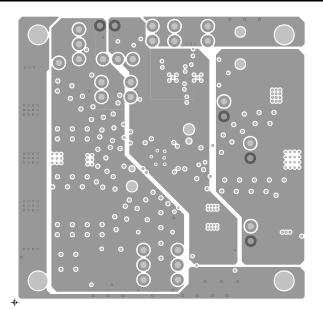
TUSB2E221EVM PCB Layer 3 (Power Plane)
